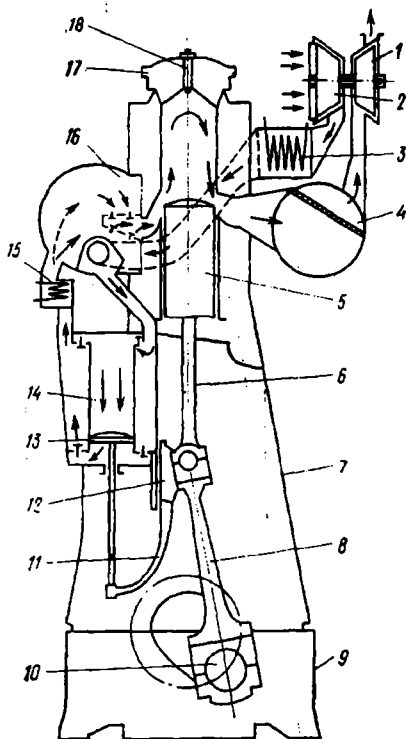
Schematic of combined two-stage turbocharging system employing turbocharger and engine-driven reciprocating pump
